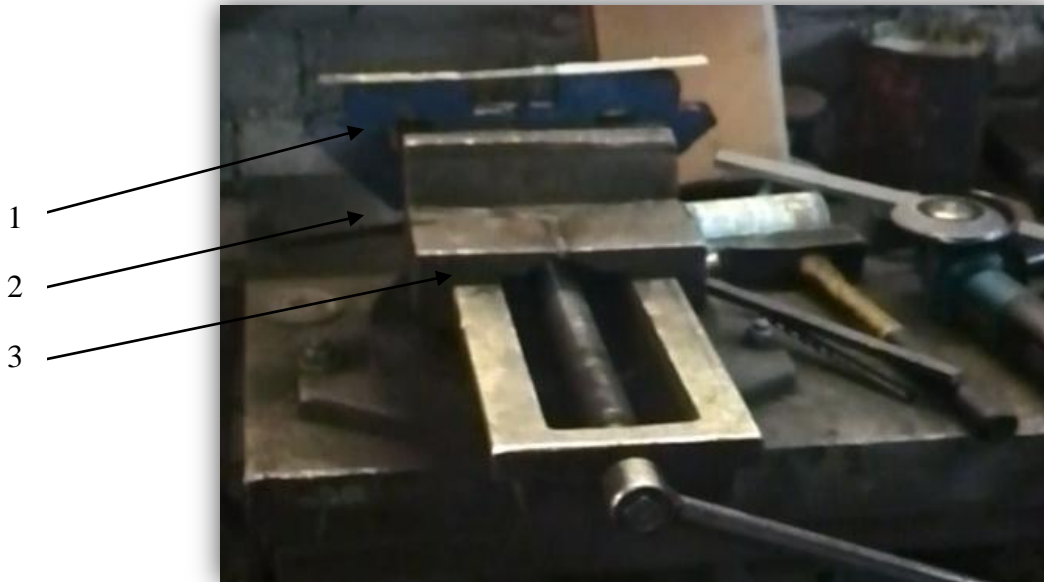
Produced glue wipers with two grinded cleaning surfaces *1
